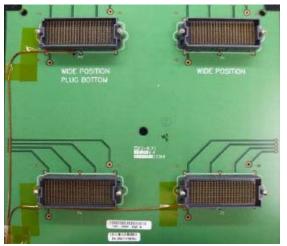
IPC-9701 daughtercard layout with 4 plugs per card for mechanical tolerance stack-up.
